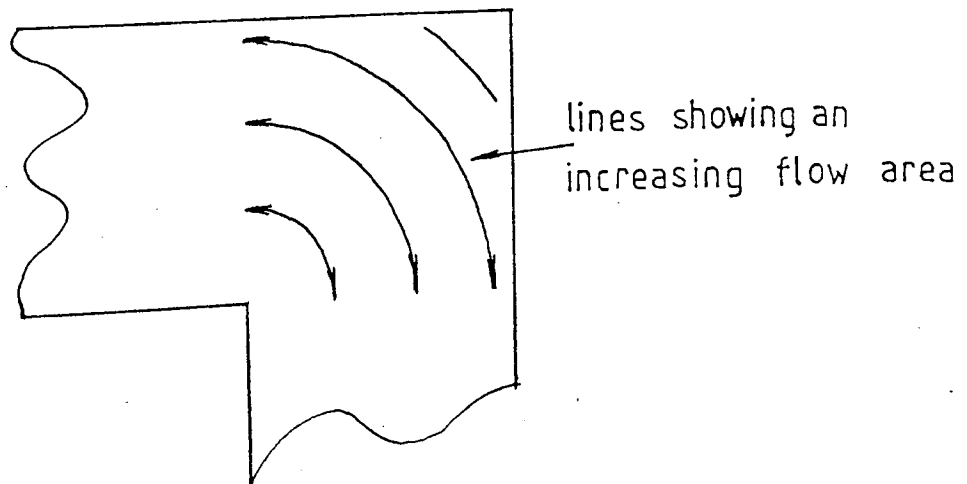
PLAN OF A HYDROSTATIC PAD CORNER
